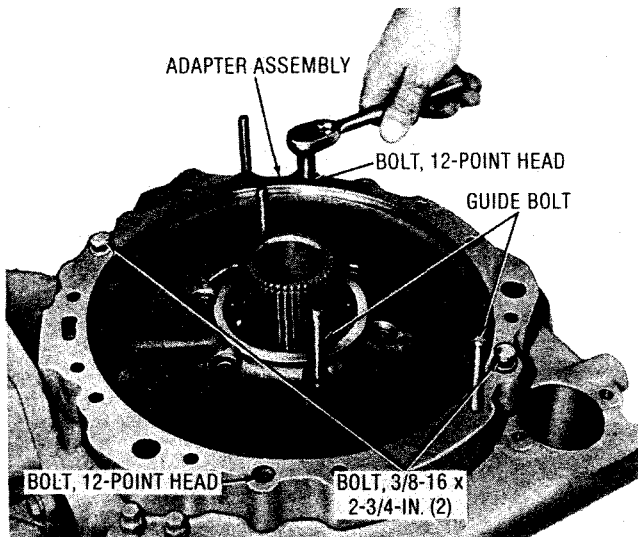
Installing adapter assembly bolts (TRT-3 overdrive)
